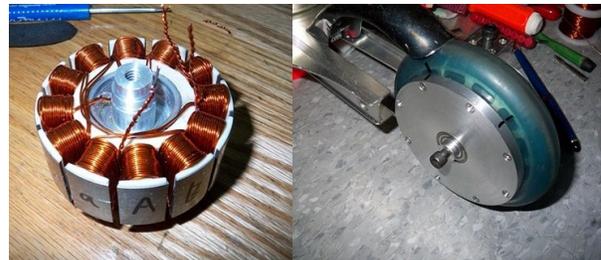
A kick-scooter wheel motor built by MIT student Charles Guan.
